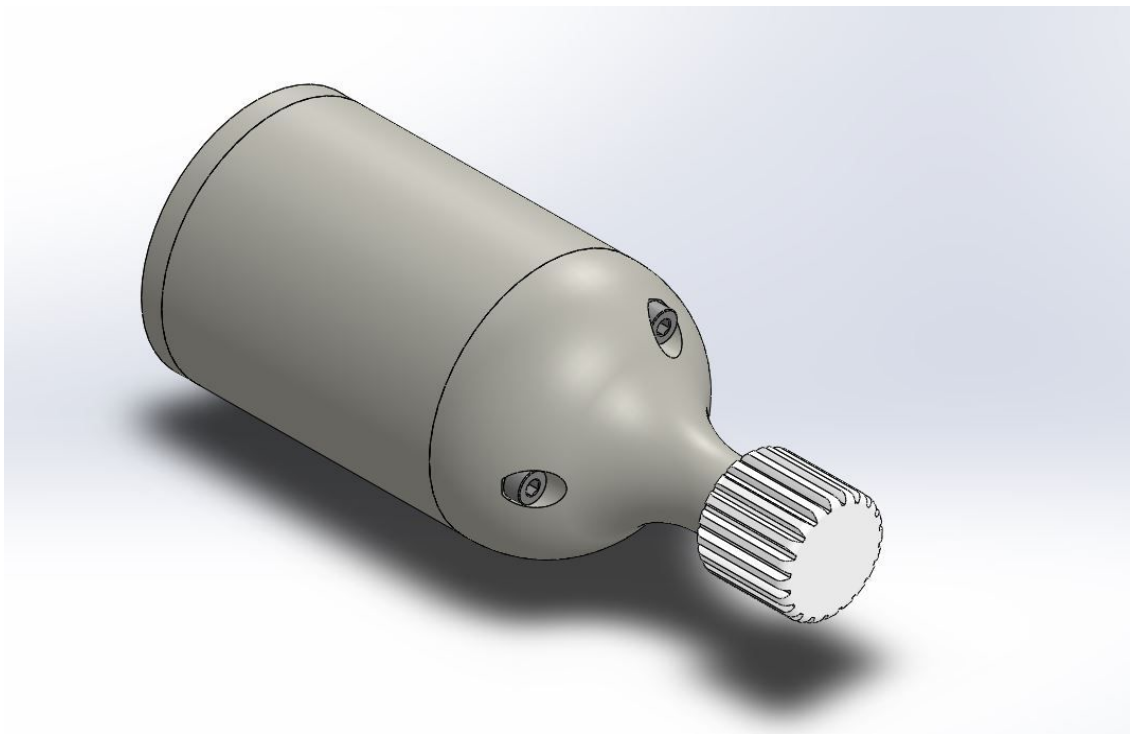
Full View of Prototype Generator Case - CAD Design
